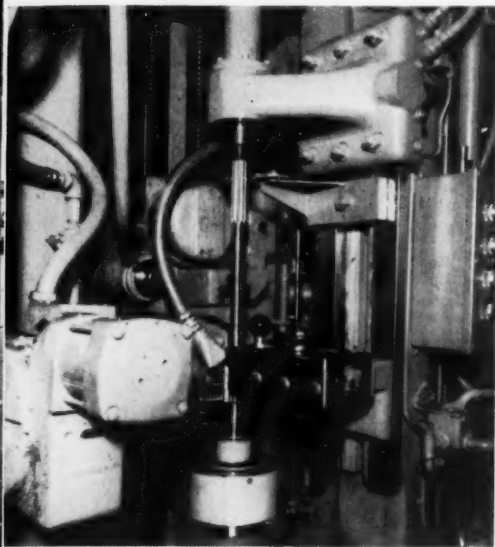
Climb hobbing of the helical spline creates high torque. A special collet chuck of high holding power and compact design is used to drive the transmission shaft.
